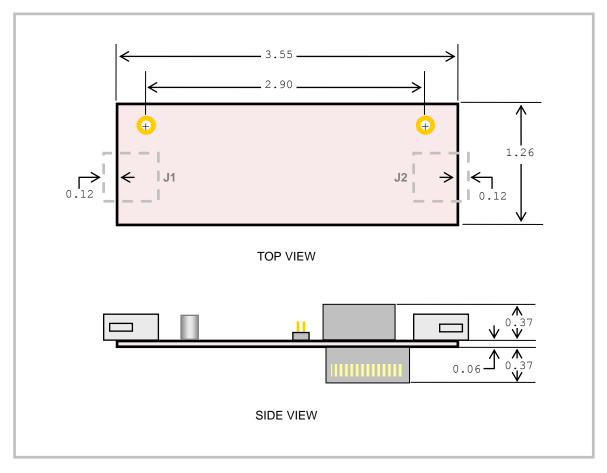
VL-EPHs-B1 Dimensions and Mounting Holes
